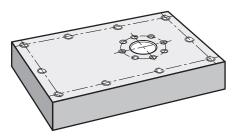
Example workpiece - programming a bolt hole circle and a row of holes
